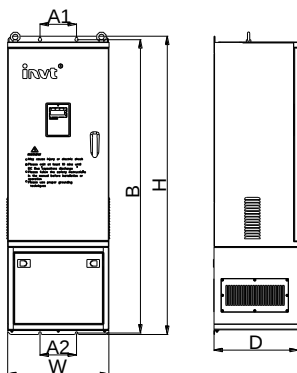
Outline dimensions and installation dimensions of the cabinet-type energy feedback unit
